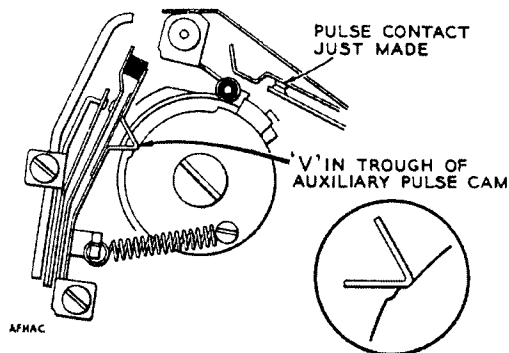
SETTING OF AUXILIARY PULSE CAM
